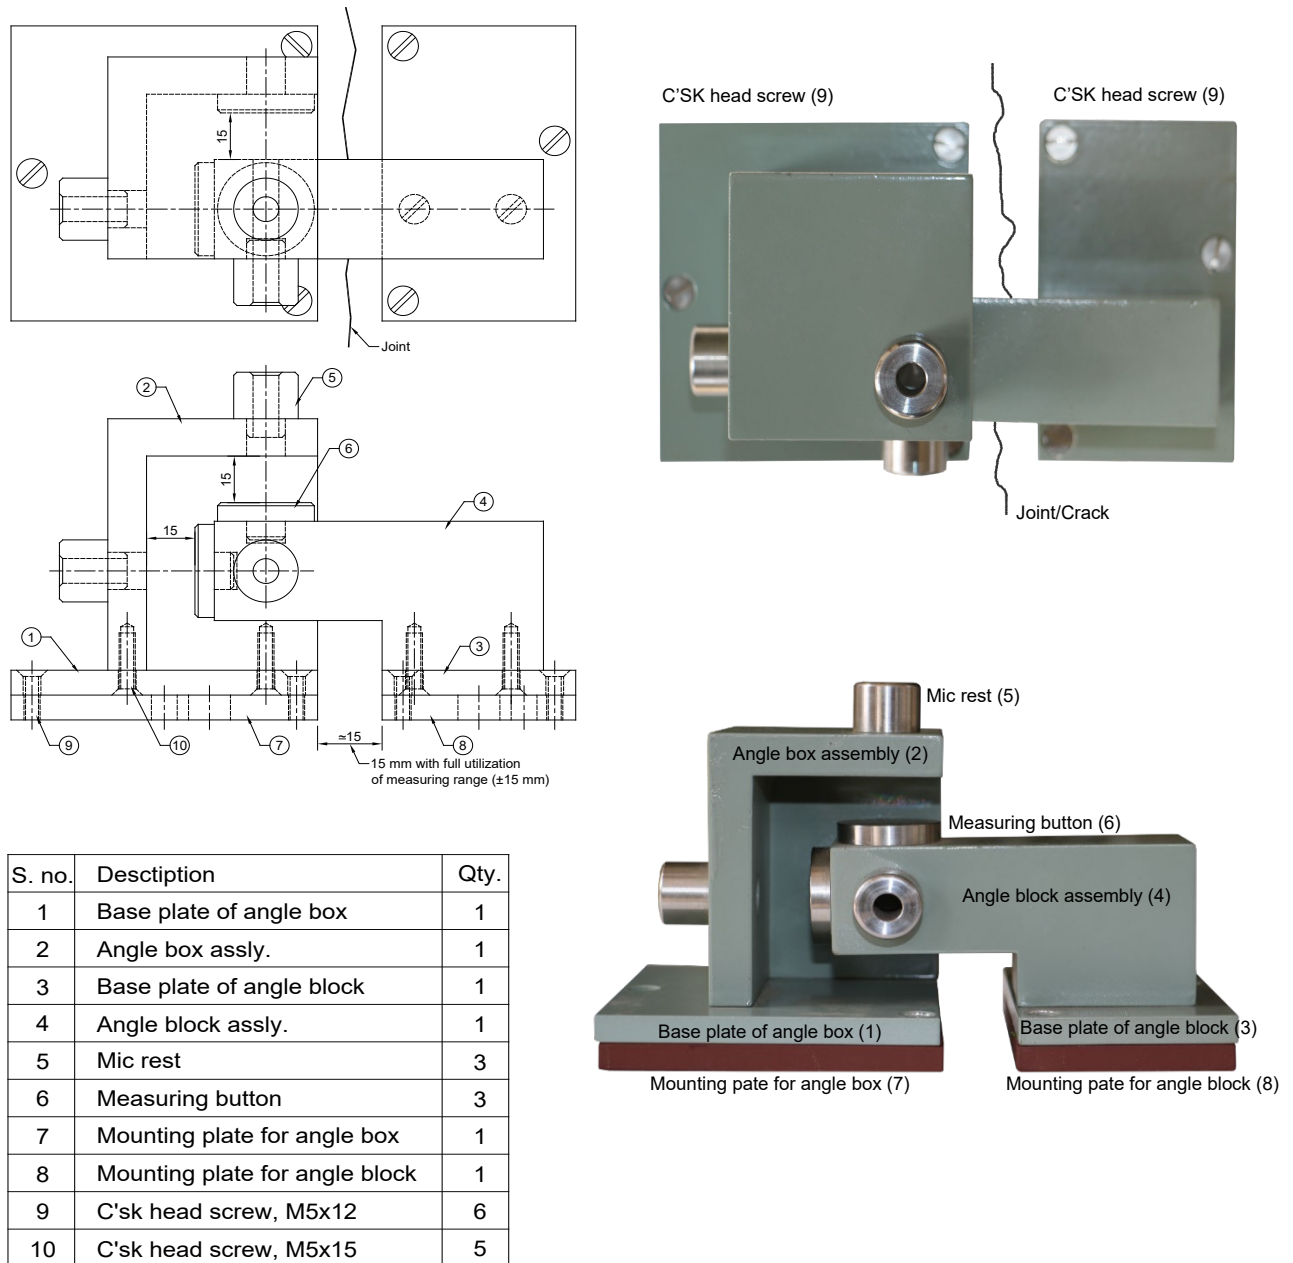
Details of EDJ-40TJ 15 mm range mechanical triaxial crack/joint meter
